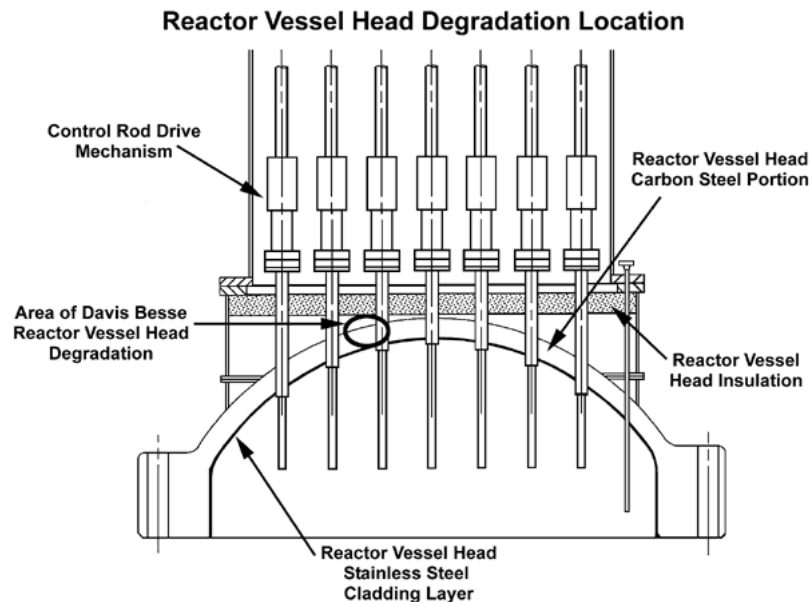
PWR vessel head penetration cracking of Alloy 600 allowed leakage of the borated coolant to occur. This corroded the RPV head externally down to the stainless steel cladding.
